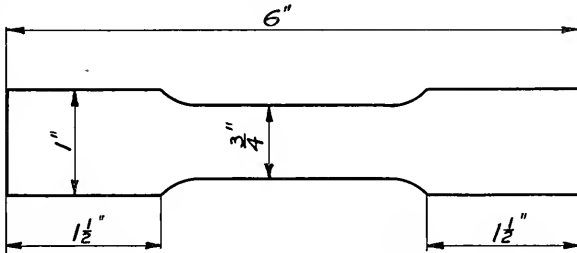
FORM OF TENSION SPECIMEN CUT FROM GIRDER
